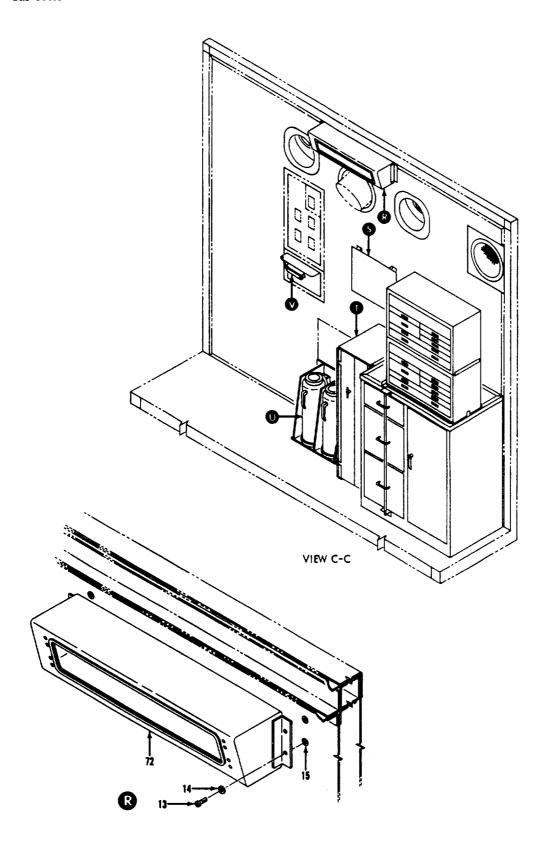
Equipment Installation (Sheet 7 of 25)
